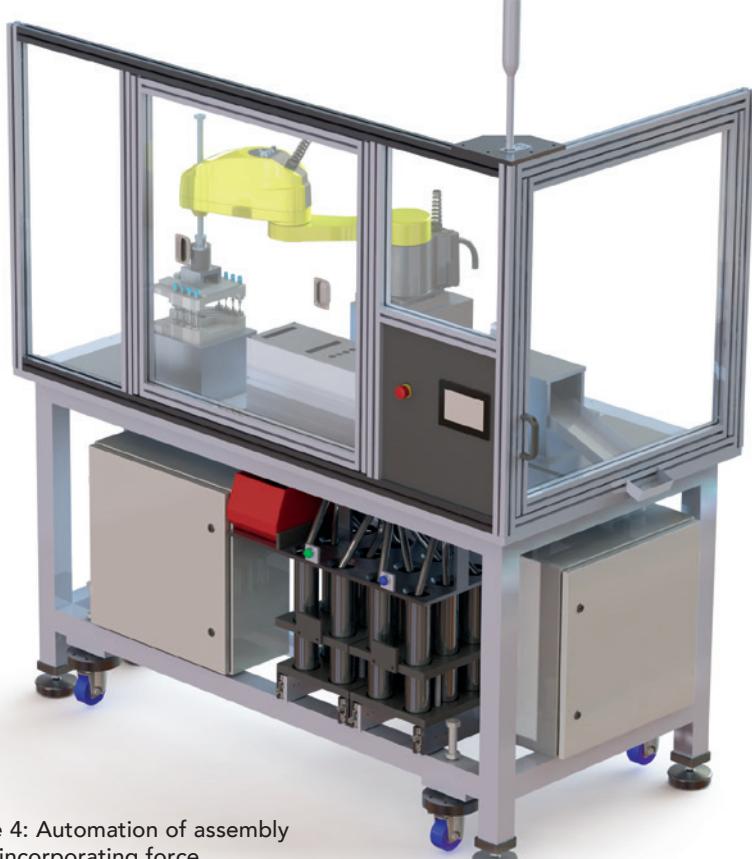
Automation of assembly steps incorporating force, distance and torque monitoring.
